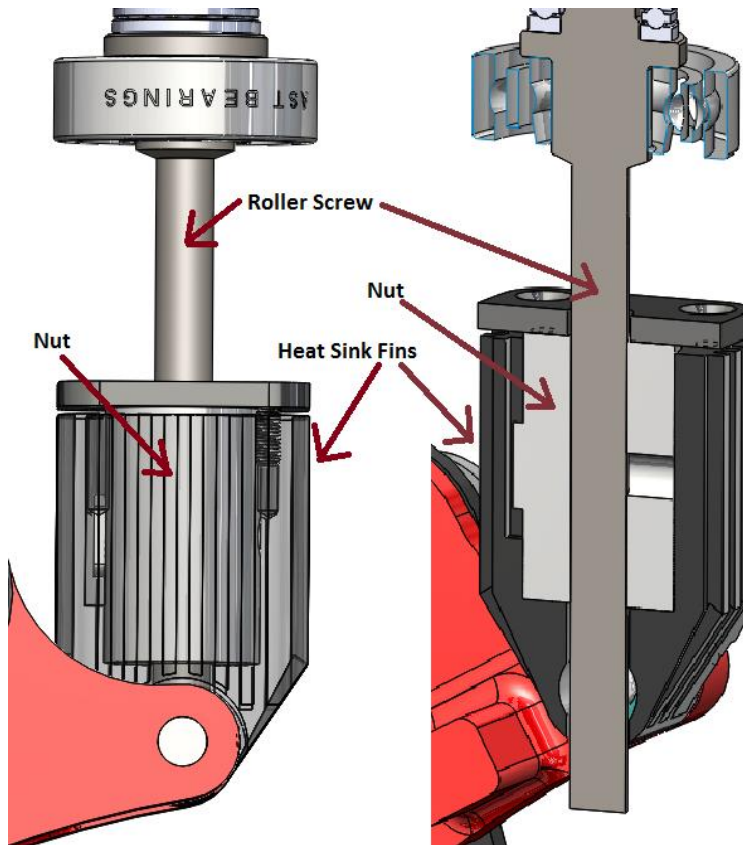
ROLLER SCREW AND NUT INCLUDING NUT HOUSING.
